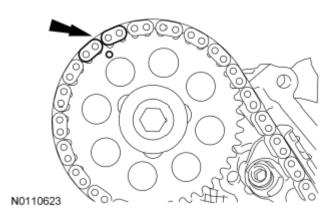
Locating RH Camshaft Sprocket Timing Mark Courtesy of FORD MOTOR CO.
